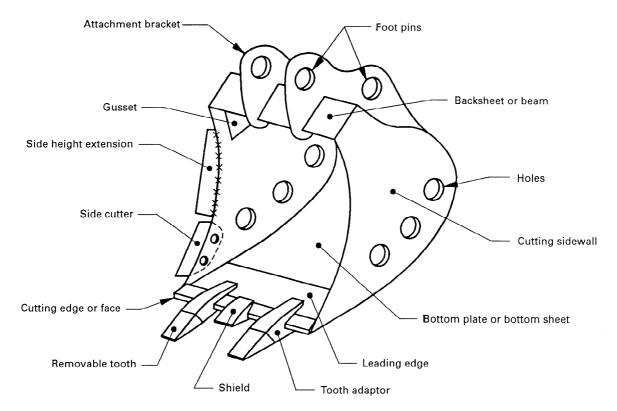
Hoe-type hydraulic excavator and backhoe loader
